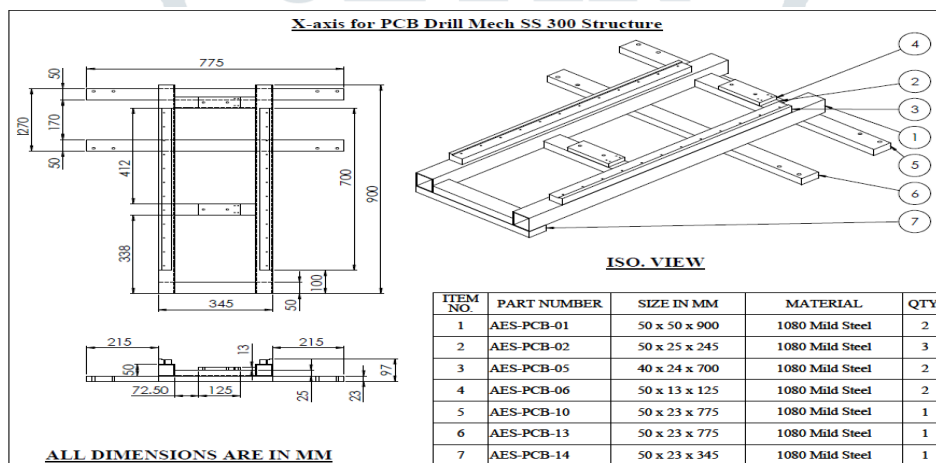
Detail view drawing X-axis of PCB Drill Mech SS 300 Structure
